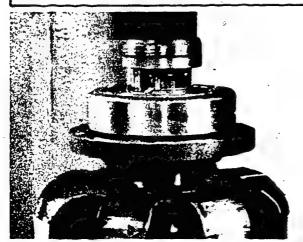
shows correct positional fit of radial seal rings in drive end frame. Fig. 37
